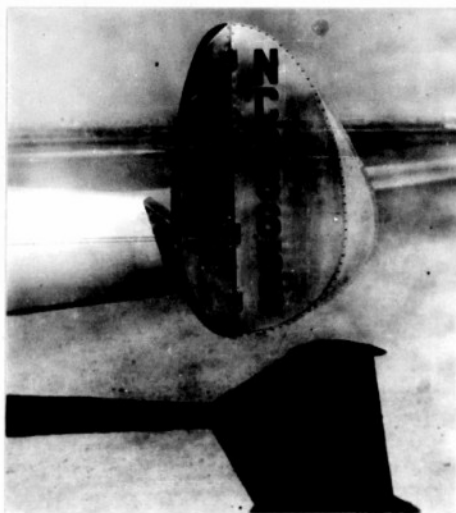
Side view of Ercoupe rudder showing dural sheet riveted to the trailing edge.
